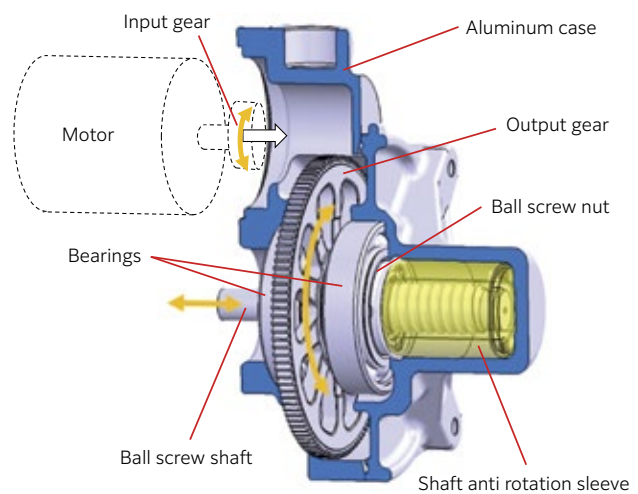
Structure of the ball screw drive module for electronic hydraulic brake
